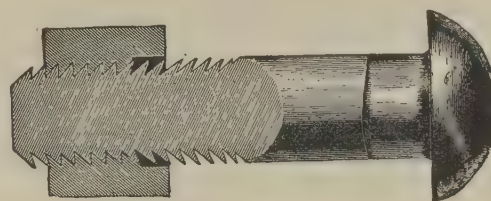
GRIP BOLT WITH RECESSED NUT.
